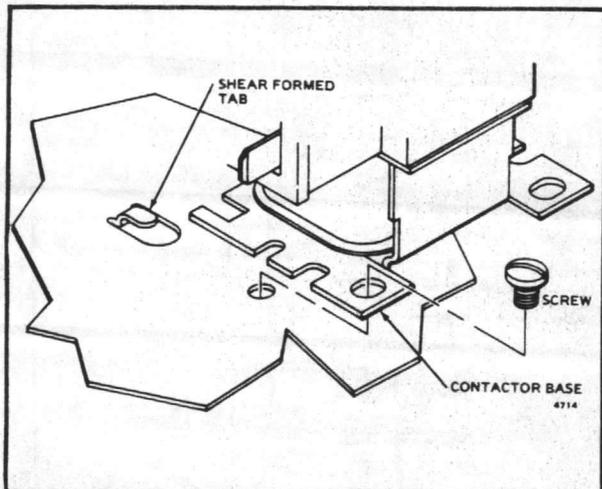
MOUNTING RELAY ON PANEL WITH SHEAR-FORMED TAB AND ONE SCREW.
